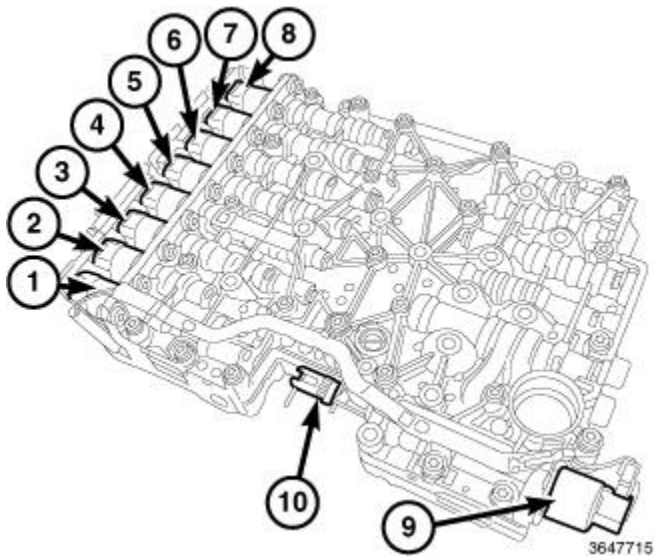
Solenoid A D E C & Park Release Mechanical Valve
